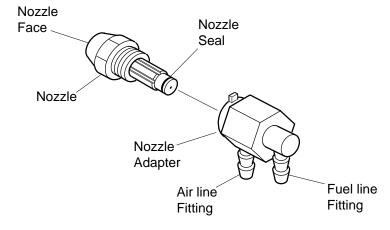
Nozzle and Nozzle Adapter, 30,000 BTU/Hr Model
